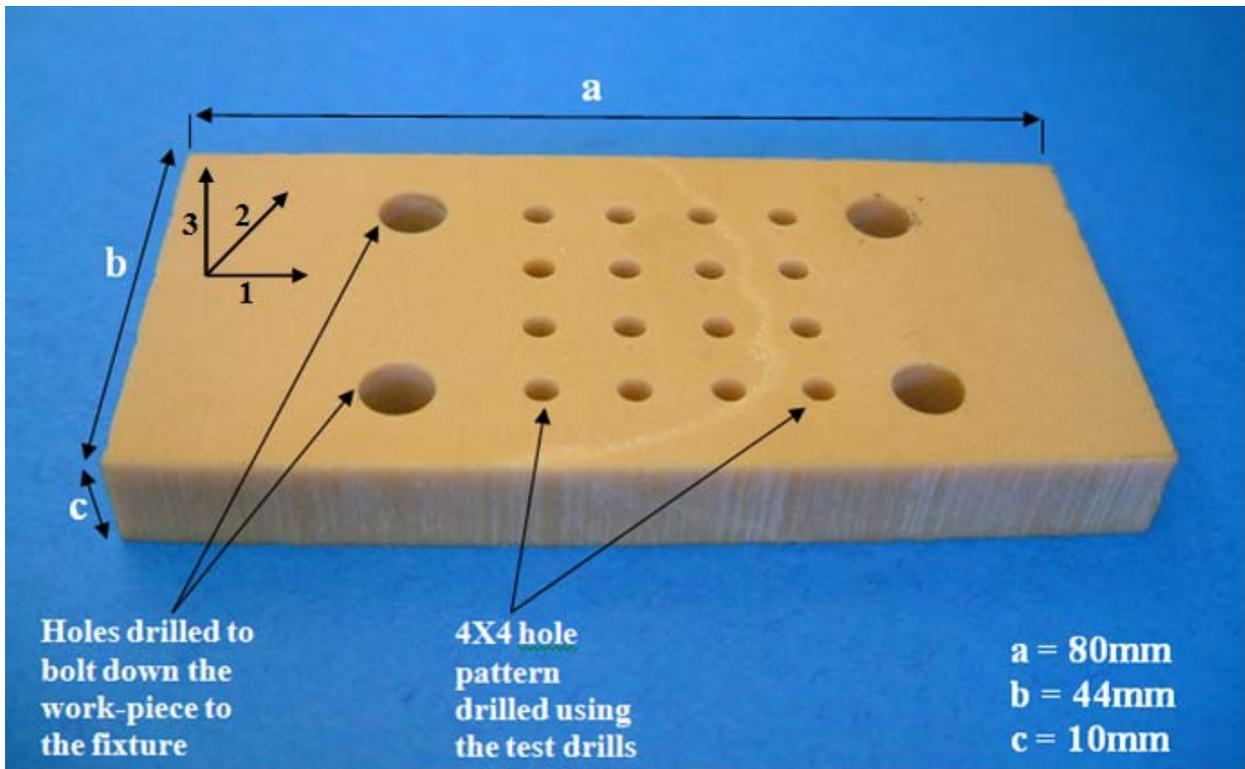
Picture of the sawbones work-piece with the 16 holes.
